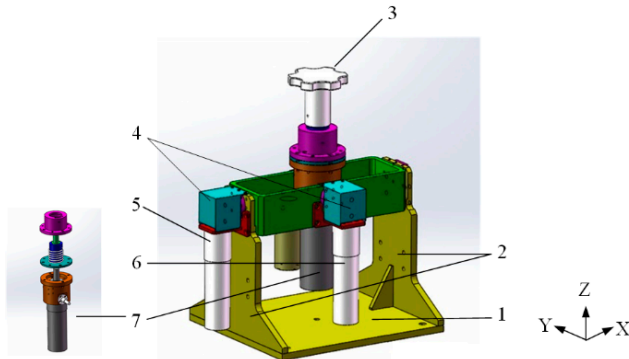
General assembly drawing of the haptic master (1) Base; (2) Cuboid frame; (3) Handle; (4) Bevel gears; (5) (6) Actuators and photoelectric encoders; (7) Cylinder sleeve
